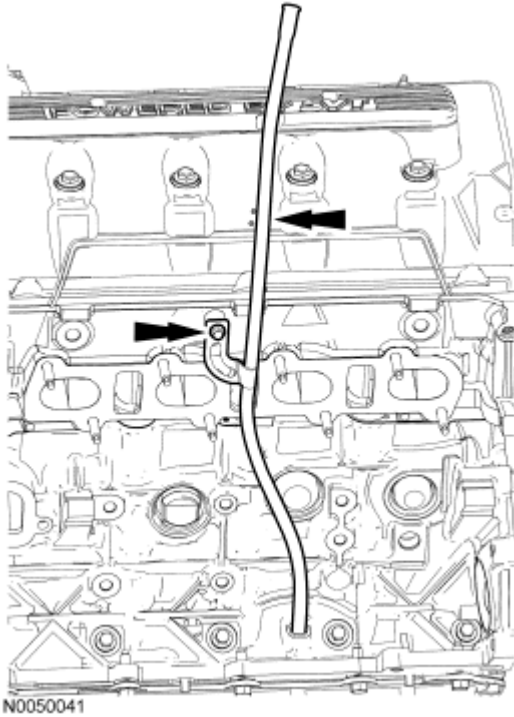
Identifying Oil Level Indicator Tube & Bolt
